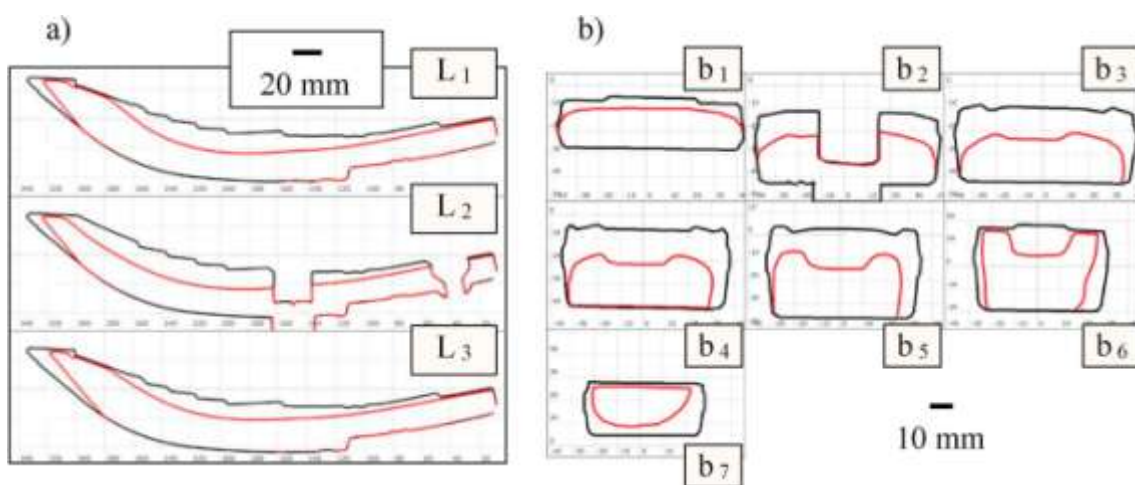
Cross-sections of the B coulters (element installed on the fourth cultivator beam, sliding distance: 1524.9 km): a – longitudinal sections, b – perpendicular sections: b₁, b₂, b₃, b₄, b₅ – sections in the area of base material, b₆, b₇ – sections in the area of cemented carbide plates.
